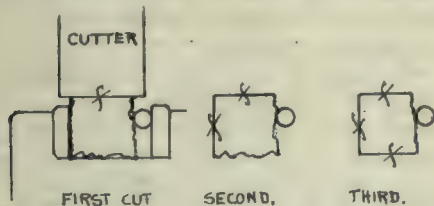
ILLUSTRATION OF PRINCIPLE INVOLVED IN MACHINING WORK SQUARE.
